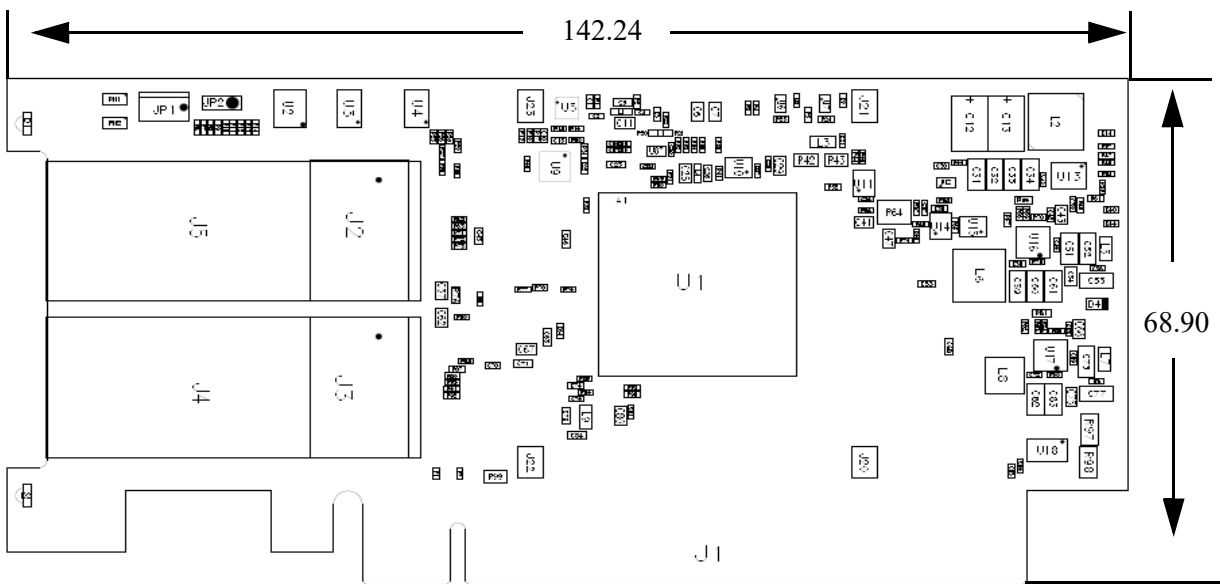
Mechanical Drawing of the Dual-port x8 Adapter Cards
